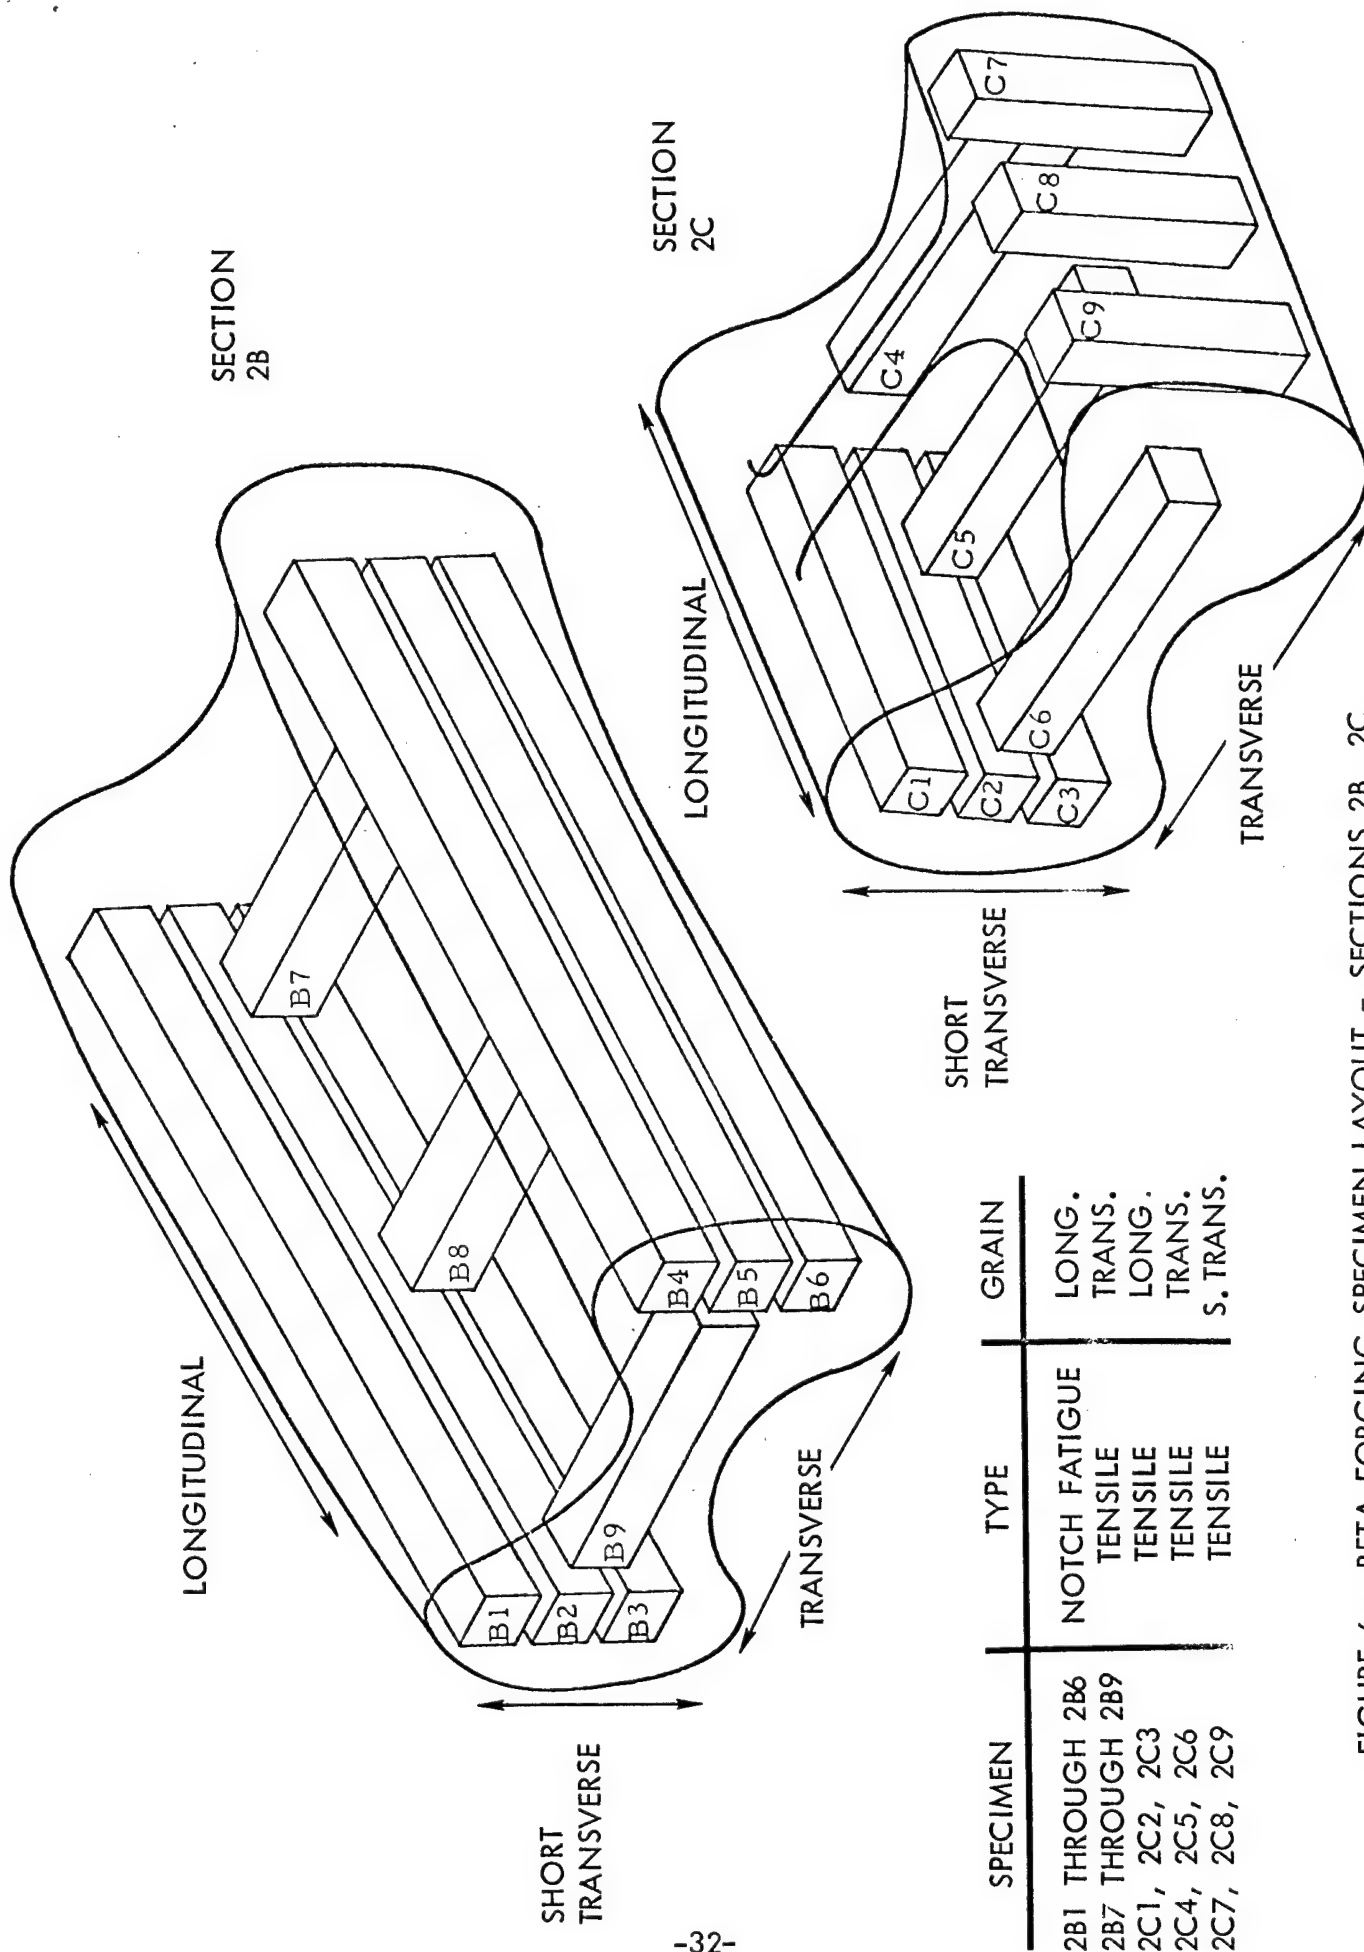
BETA FORGING SPECIMEN LAYOUT - SECTIONS 2B, 2C
